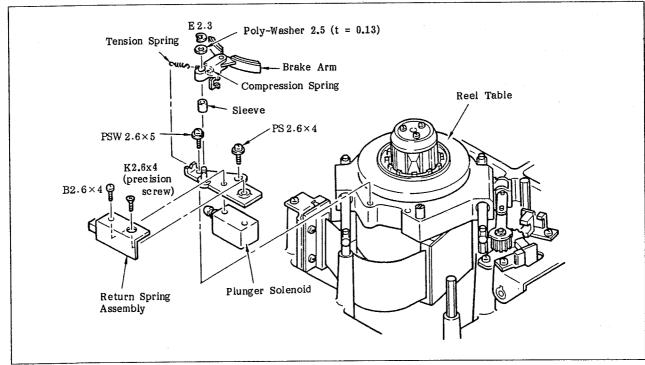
Replacing the Brake Arm and the Plunger Solenoid
